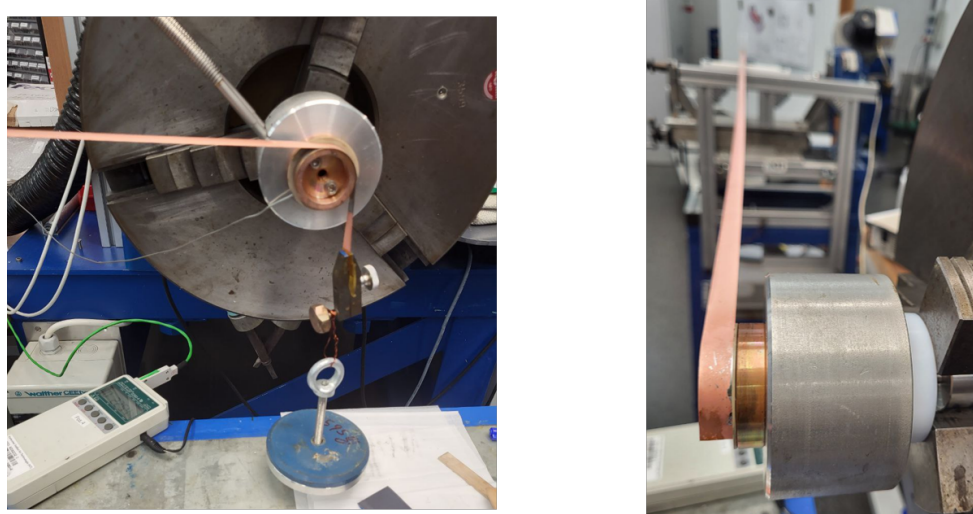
Placing the soldered face of the tape on the soldered copper body.
